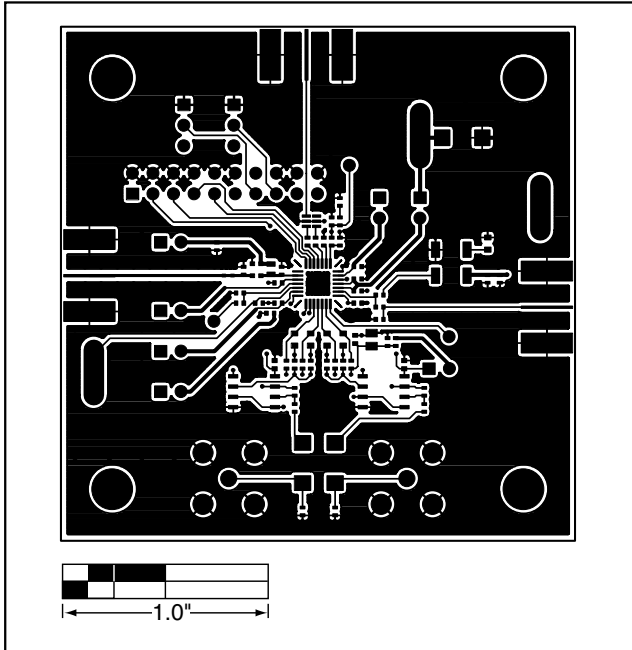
MAX2394/MAX2395 EV Kits PC Board Layout—Primary Component Side
